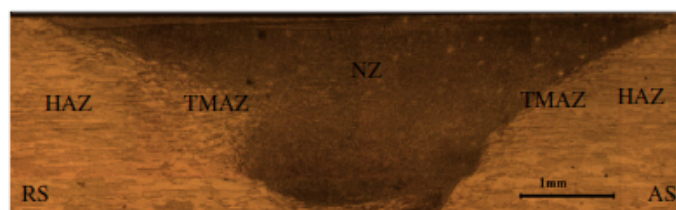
Optical image of the cross-section of friction stir welded AA2060 alloy [2].
